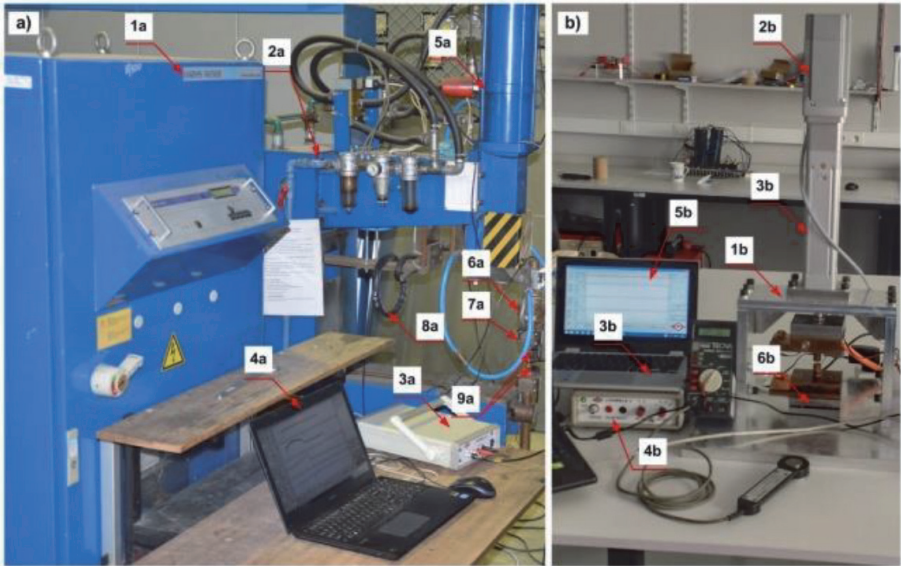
Welding machine stations: (a) SPD: (1a) inverter welding power source Harms & Wende (25 kA, 1 kHz), (2a) welding machine housing ASPA (5.5 kN), (3a, 4a) measurement device LogWeld 4, (5a) pneumatic actuator, (6a) head for measurements of electrode force, (7a) laser sensor for displacement measurements, (8a) electrode current measurement sensor and (9a) leads for measurements of welding voltage. (b) SED: (1b) electromechanical welding machine $F = 2$ kN, (2b) servomotor, (3b) linear gear, (4b, 5b) measurement device LogWeld 4 and (6b) electrode force measurement module.
